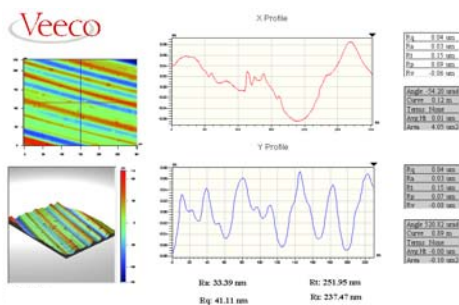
Dimensional shape of the surface roughness for machined surface of oxygen-free copper
